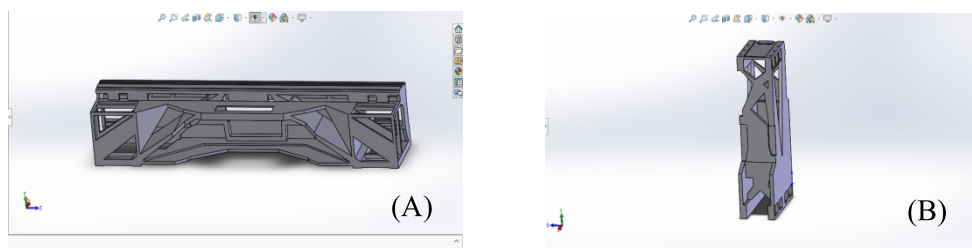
Structure drawing of (A) the new beam and (B) the new column
